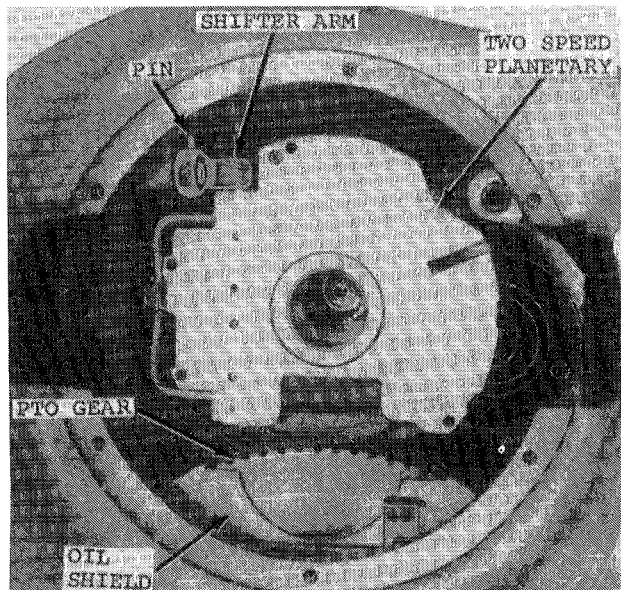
View of Quad-Range two-speed planetary with clutch operating piston housing removed. Fabricate a tool with a hook on one end to remove planetary input shaft. Refer to text.
